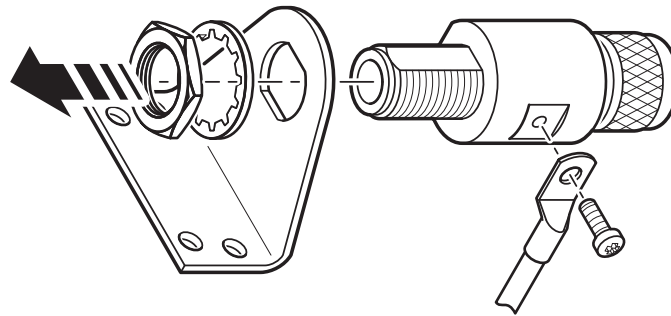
Assembly of the MBG-S-PRO Surge Protector
